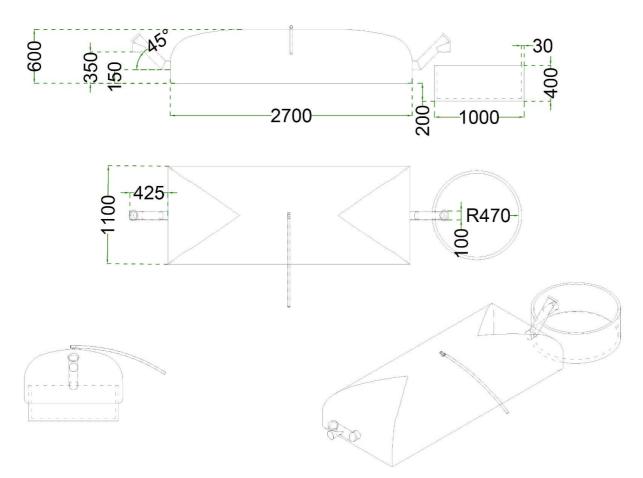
Technical drawing digester 1.5 $\ensuremath{m^3}$
